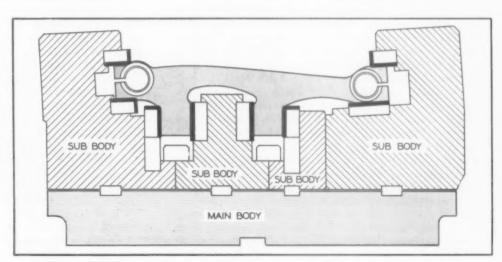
At right is the redesigned machine setup for broaching the front bindle shown in Fig. 2. Eight surfaces the broached, and the new method enabled the part to be completed in one
